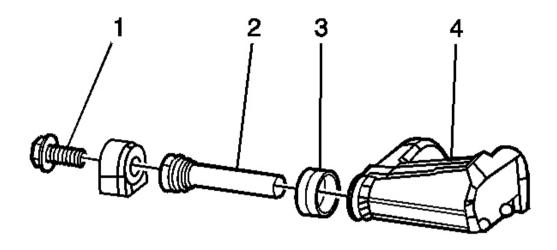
Inspecting Brake Caliper Components Courtesy of GENERAL MOTORS CORP.
